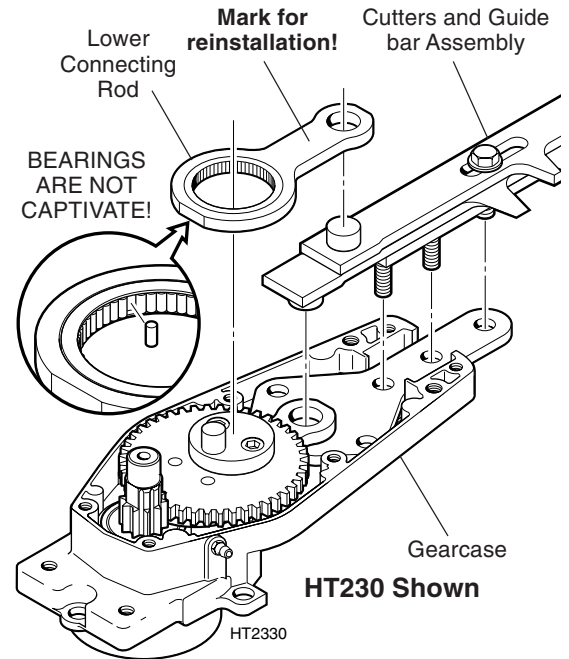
Removing the upper con-rod and cutters and guide bar assembly.
